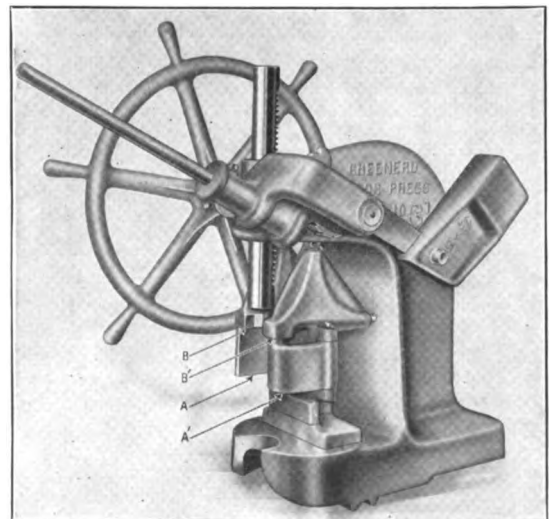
ARBOR PRESS WITH MOLDING ATTACHMENT
